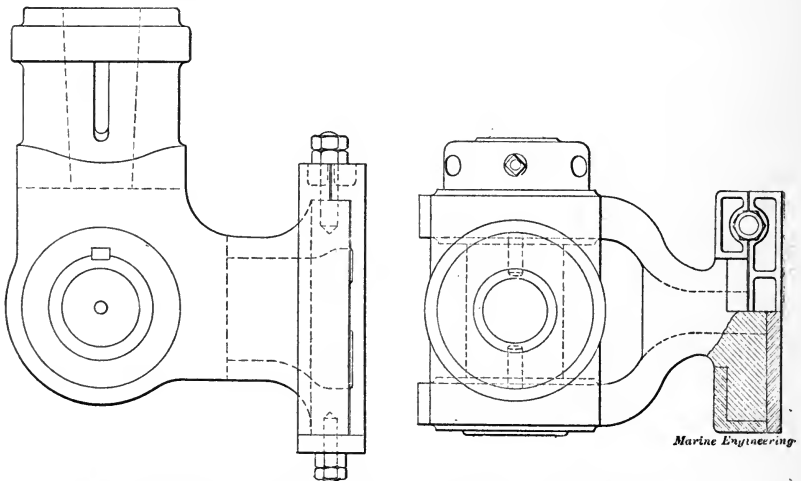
Marine Crosshead, Slipper Type with Cotter Fastening for Piston Rod.
